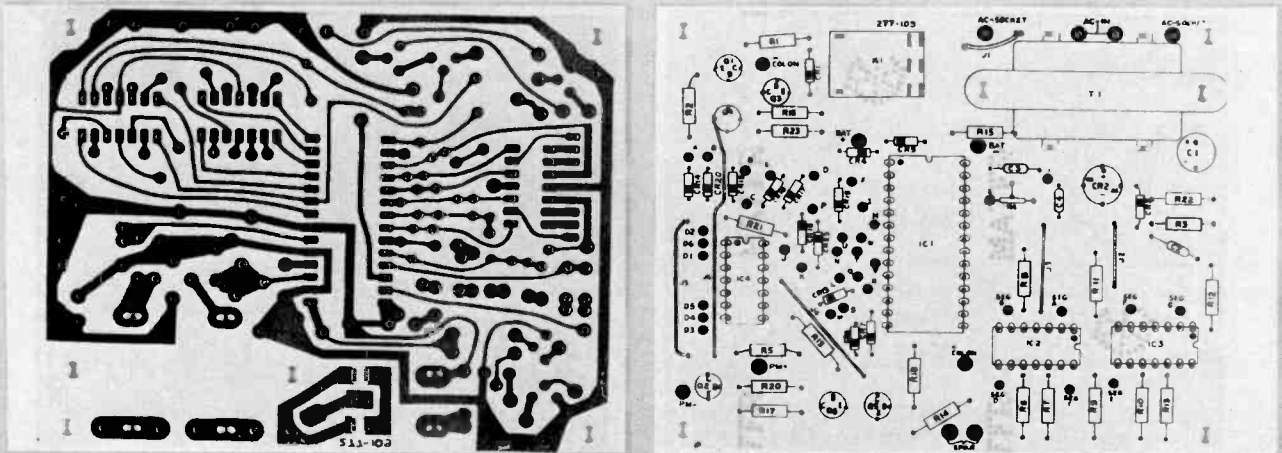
Top and bottom views of a printed circuit board designed for a digital clock. The outlines of the components and their identification numbers are stenciled on the front of the board to simplify assembly. The dark areas on the rear of the board are copper. (All photos by I. Kahn.)
